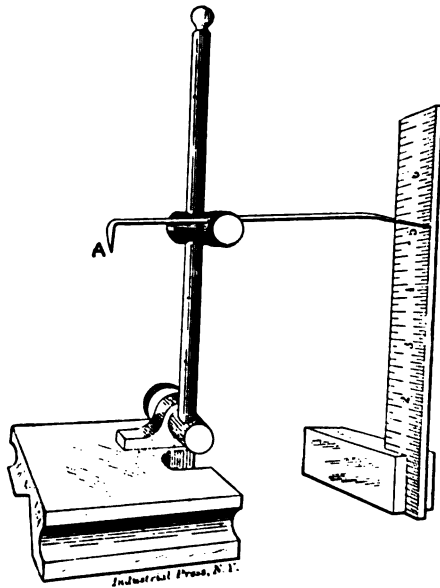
Method of Adjusting the Needle of a Surface Gage
